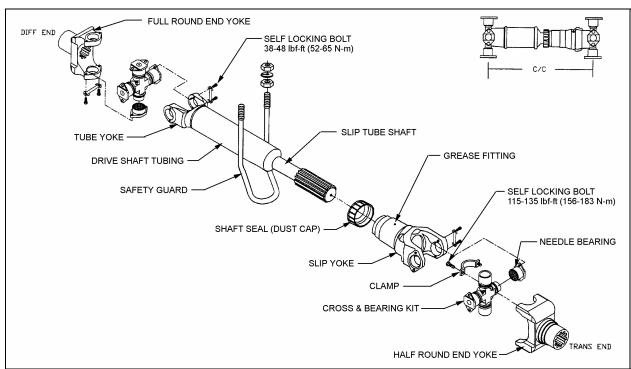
PROPELLER SHAFT ASSEMBLY
